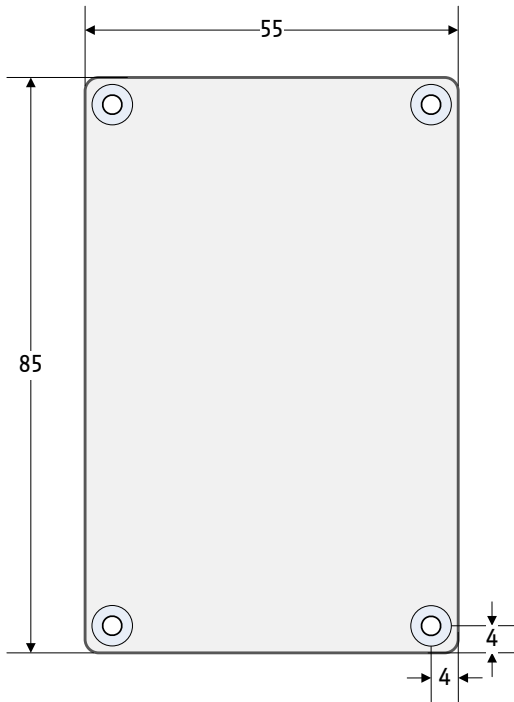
Dimensions: TMC5062-EVAL and STARTRAMPE
